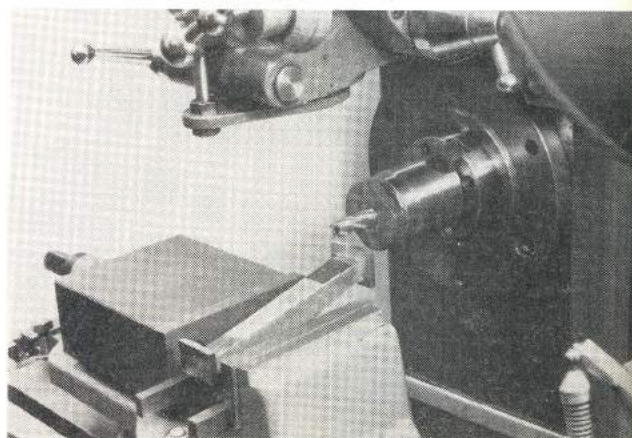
Machining the column on the milling machine. The vice is set accurately by the use of a d.t.i.
